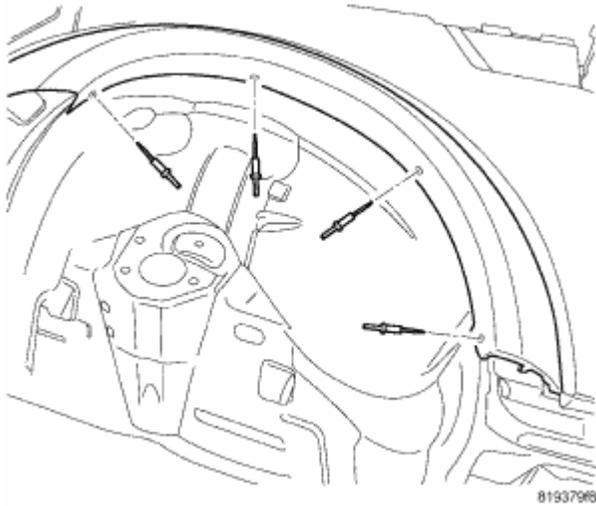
Removing/Installing Rivets Connecting Fender Flare To Wheel House Liner
